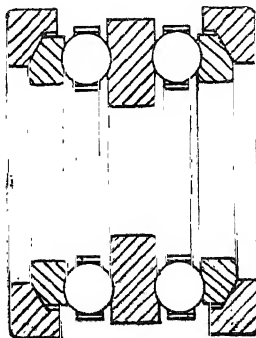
Double-thrust bearing with spherical end-seating rings.
